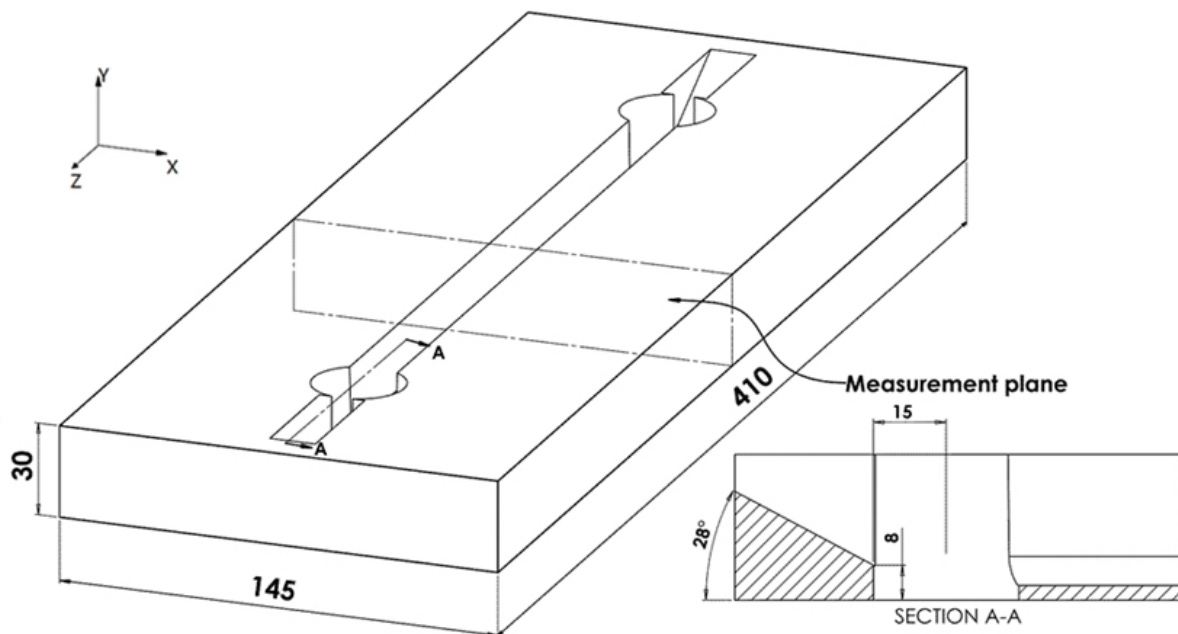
Schematic representation of overall specimen geometry for welding experiments at a thickness of 30 mm. Although not shown here, the weld groove geometry varied according to the welding process.
